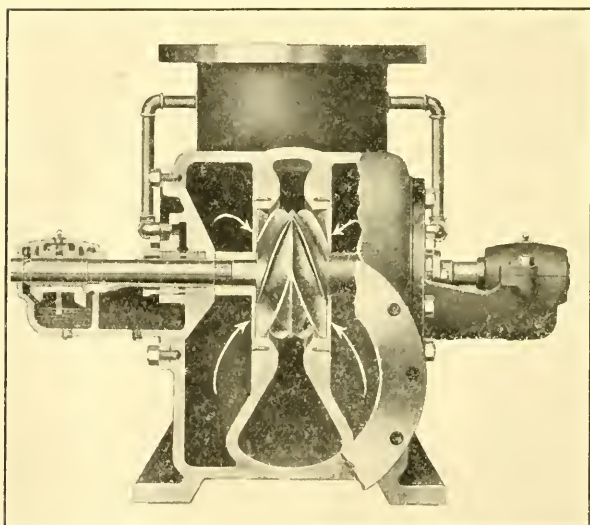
SECTION OF PUMP SHOWING HELICOIDAL IMPELLER IN PLACE
